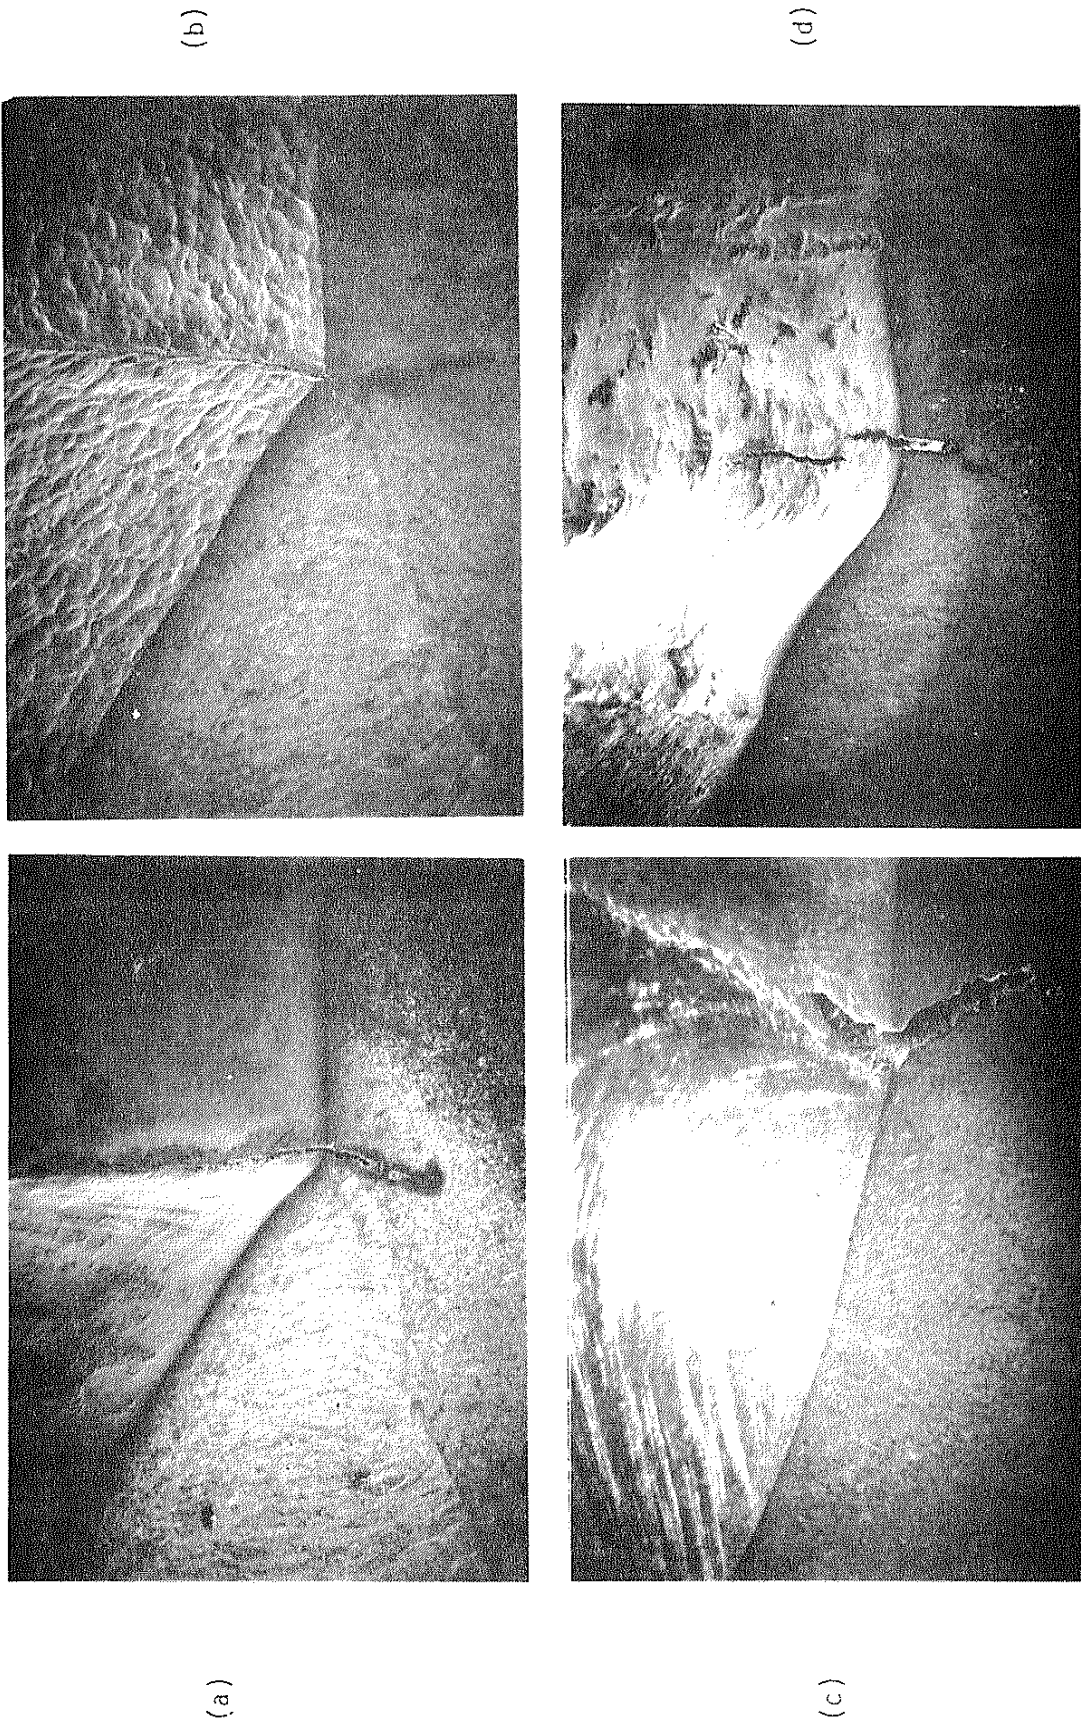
SEM Photographs (15x) of toe configurations of A36/E60S specimens with developed fatigue cracks; (a) as-welded: crack at toe; (b) shot-peened: crack at toe; (c) TIG-dressed: crack at new toe with undercut; (d) laser-dressed: crack at dressed bead with severe undercut. All four treatments satisfy the  $K_f$  max condition.
